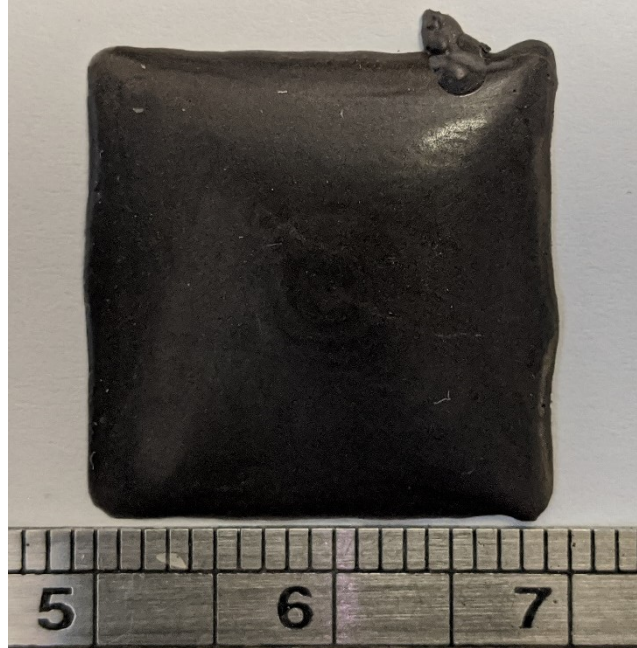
Specimen cracking observed at a lower magnetic filler loading
